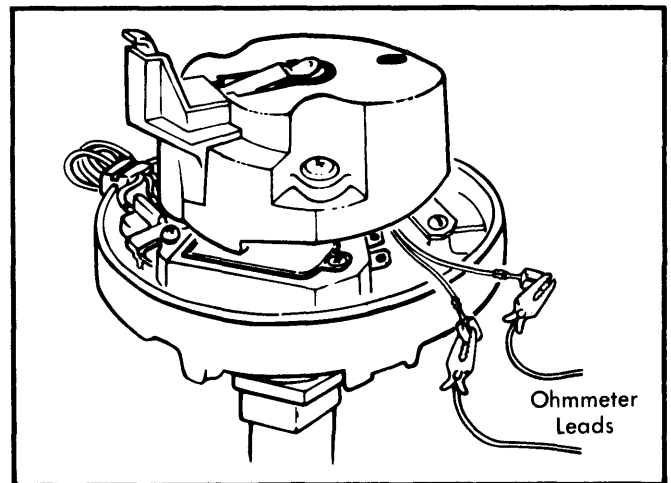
Connection for Pick-Up Coil Assembly Resistance Test
